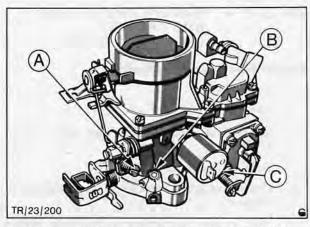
Motorcraft manual choke carburettor (By-pass idle)
